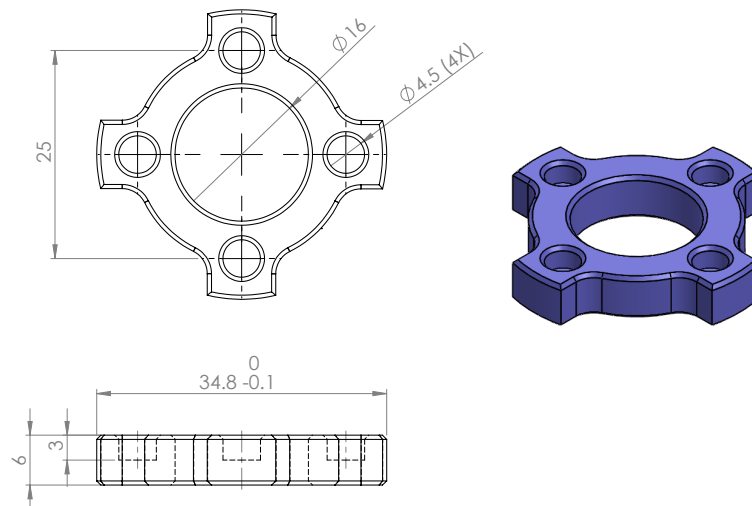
Engineering drawing of the stainless-steel module. Dimensions are in mm
